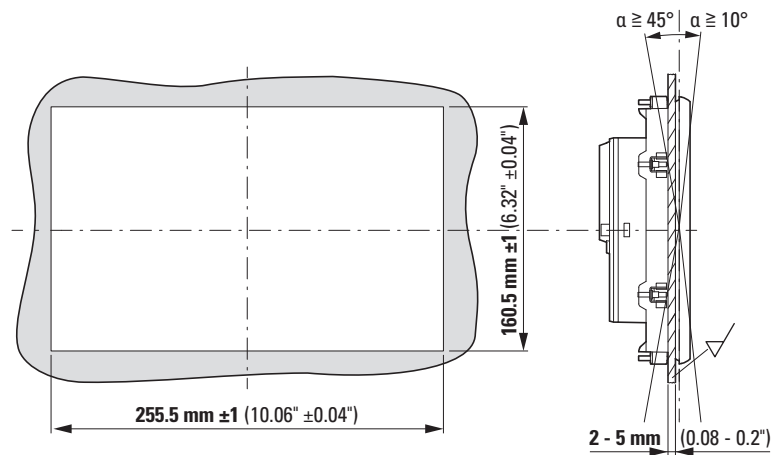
Mounting cutout for 10.1" front mounting devices in mm (inches)
